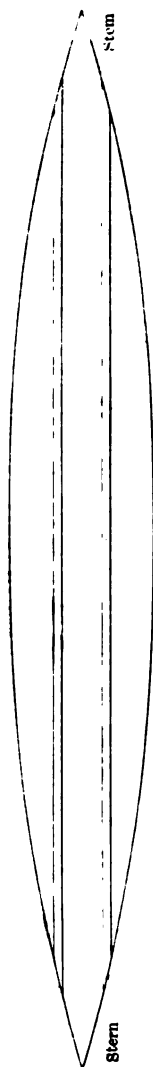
FLOOR OF PUNT CUT OUT TO SHAPE AND SIZE
